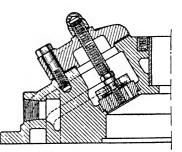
High-pressure-cylinder check valve for compressor in Fig. 137.
